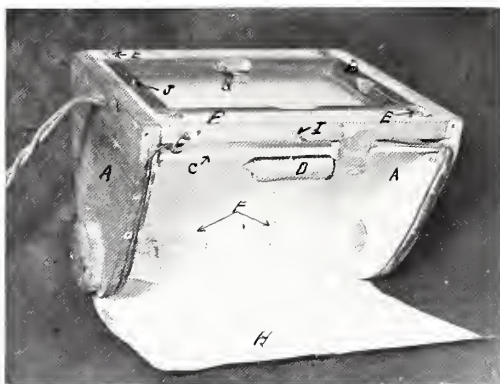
THE LAMP PARTLY CONSTRUCTED
